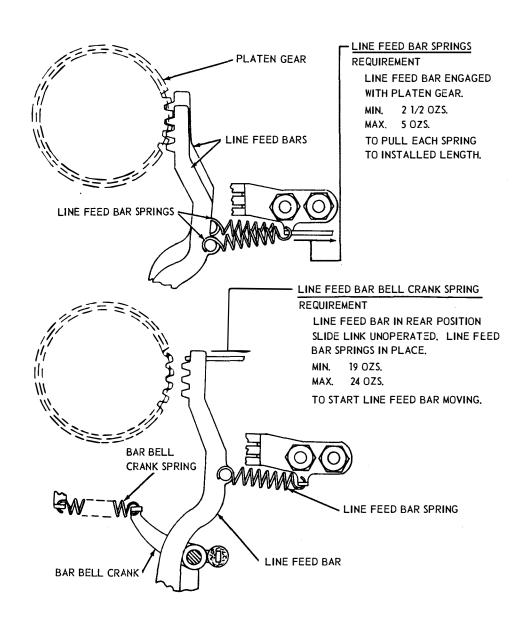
TYPING UNIT, LINE FEED MECHANISM, RIGHT SIDE VIEW
